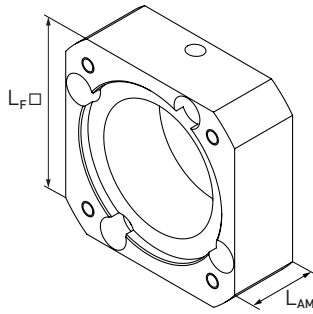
Motor gearbox adapter plate GM for bridge axes HB-R and cantilever axes HC-R
